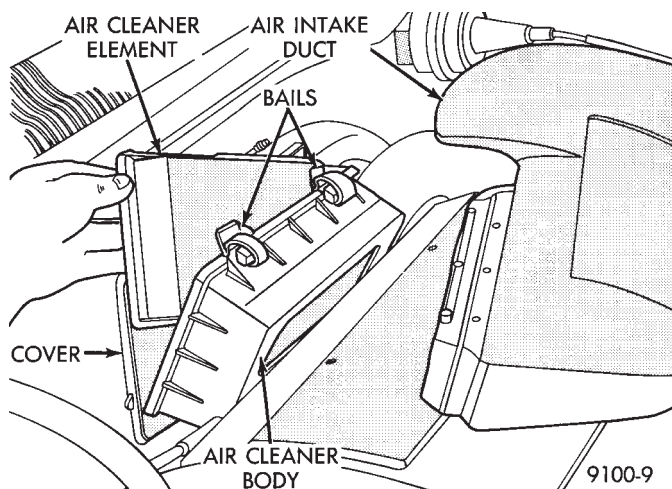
Air Cleaner Assembly—16 Valve Engine
